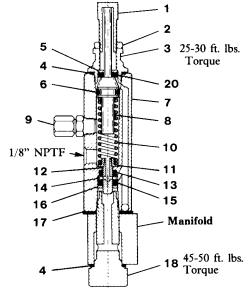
A. INJECTOR (MANIFOLD TYPE)
